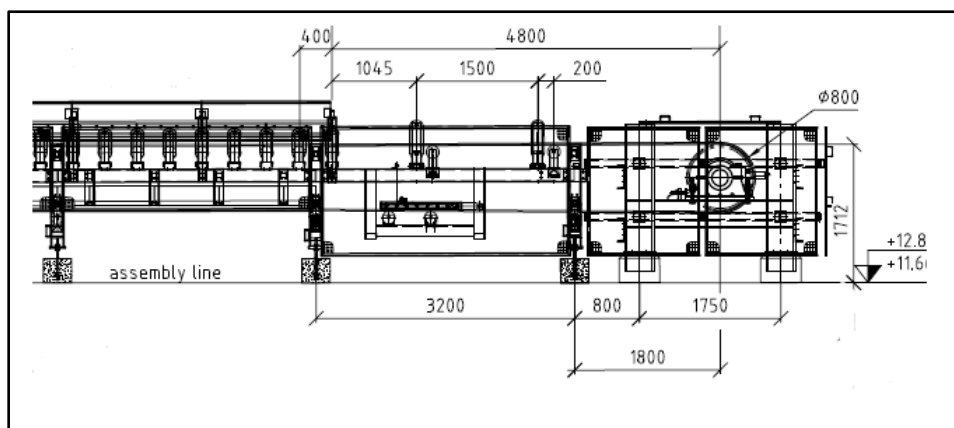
Elevation of Existing Reclaim Conveyor Showing Tail End
